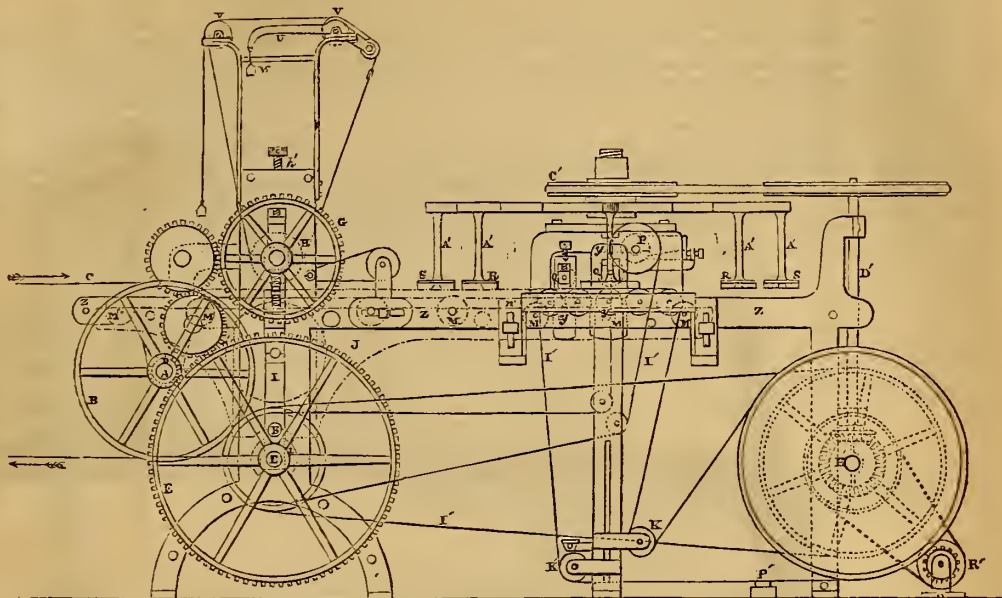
PLATE PRINTING MACHINE, FOR ENGRAVED PLATES.
